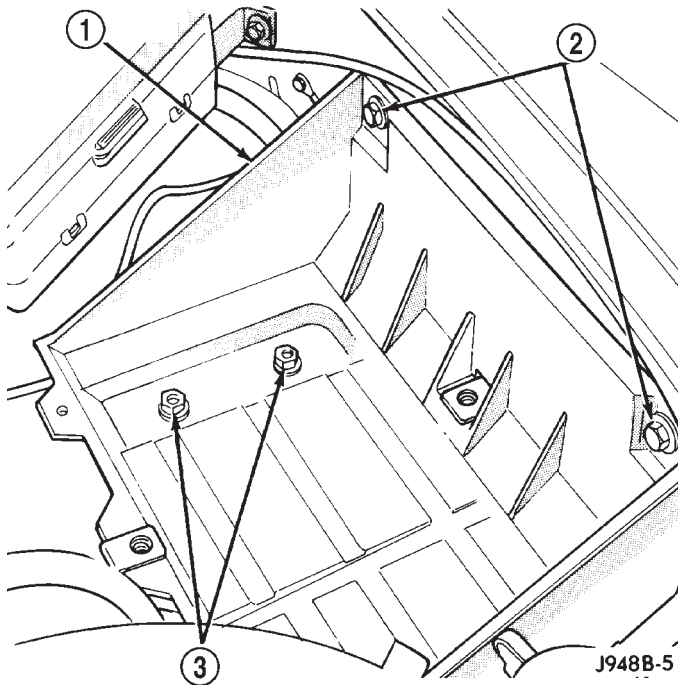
Battery Tray Upper Mounting Bolts/Nuts
